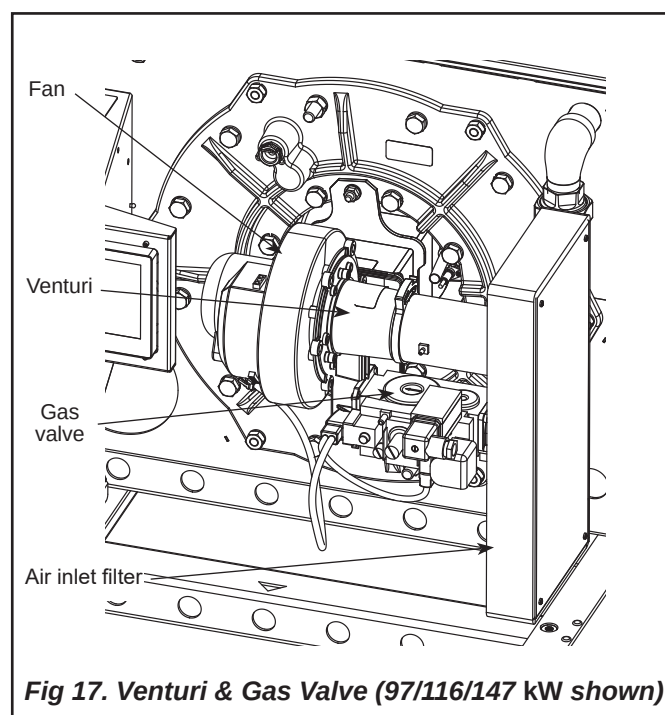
Venturi & Gas Valve (97/116/147 kW shown)
